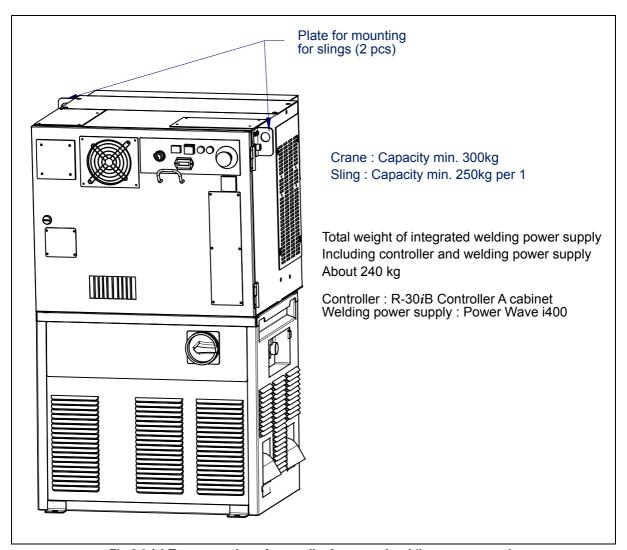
(a) Transportation of controller integrated welding power supply
